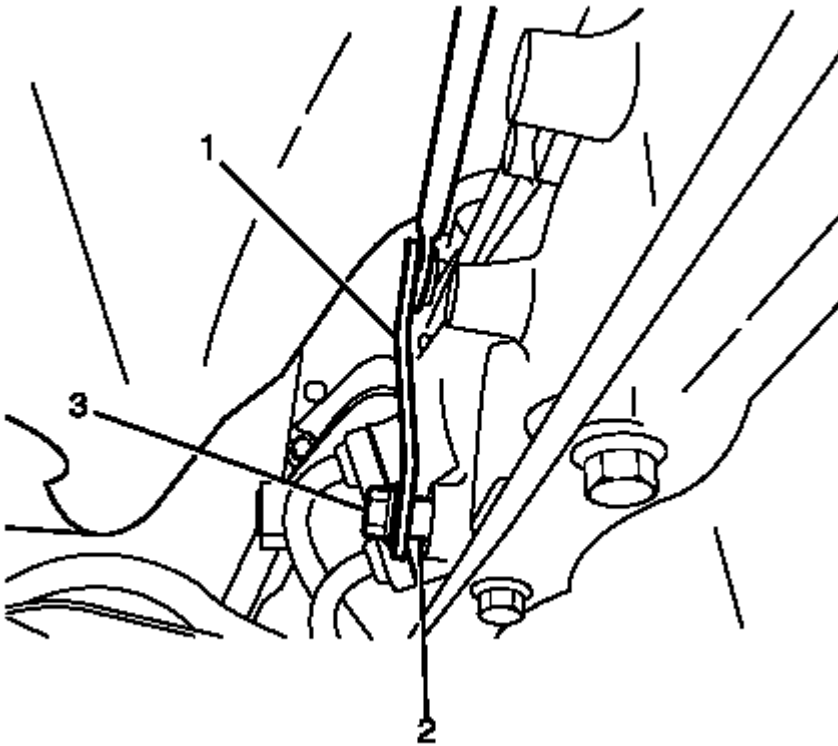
Identifying Shift Selector Linkage Rod To Shift Selector Shaft Retaining Nut
